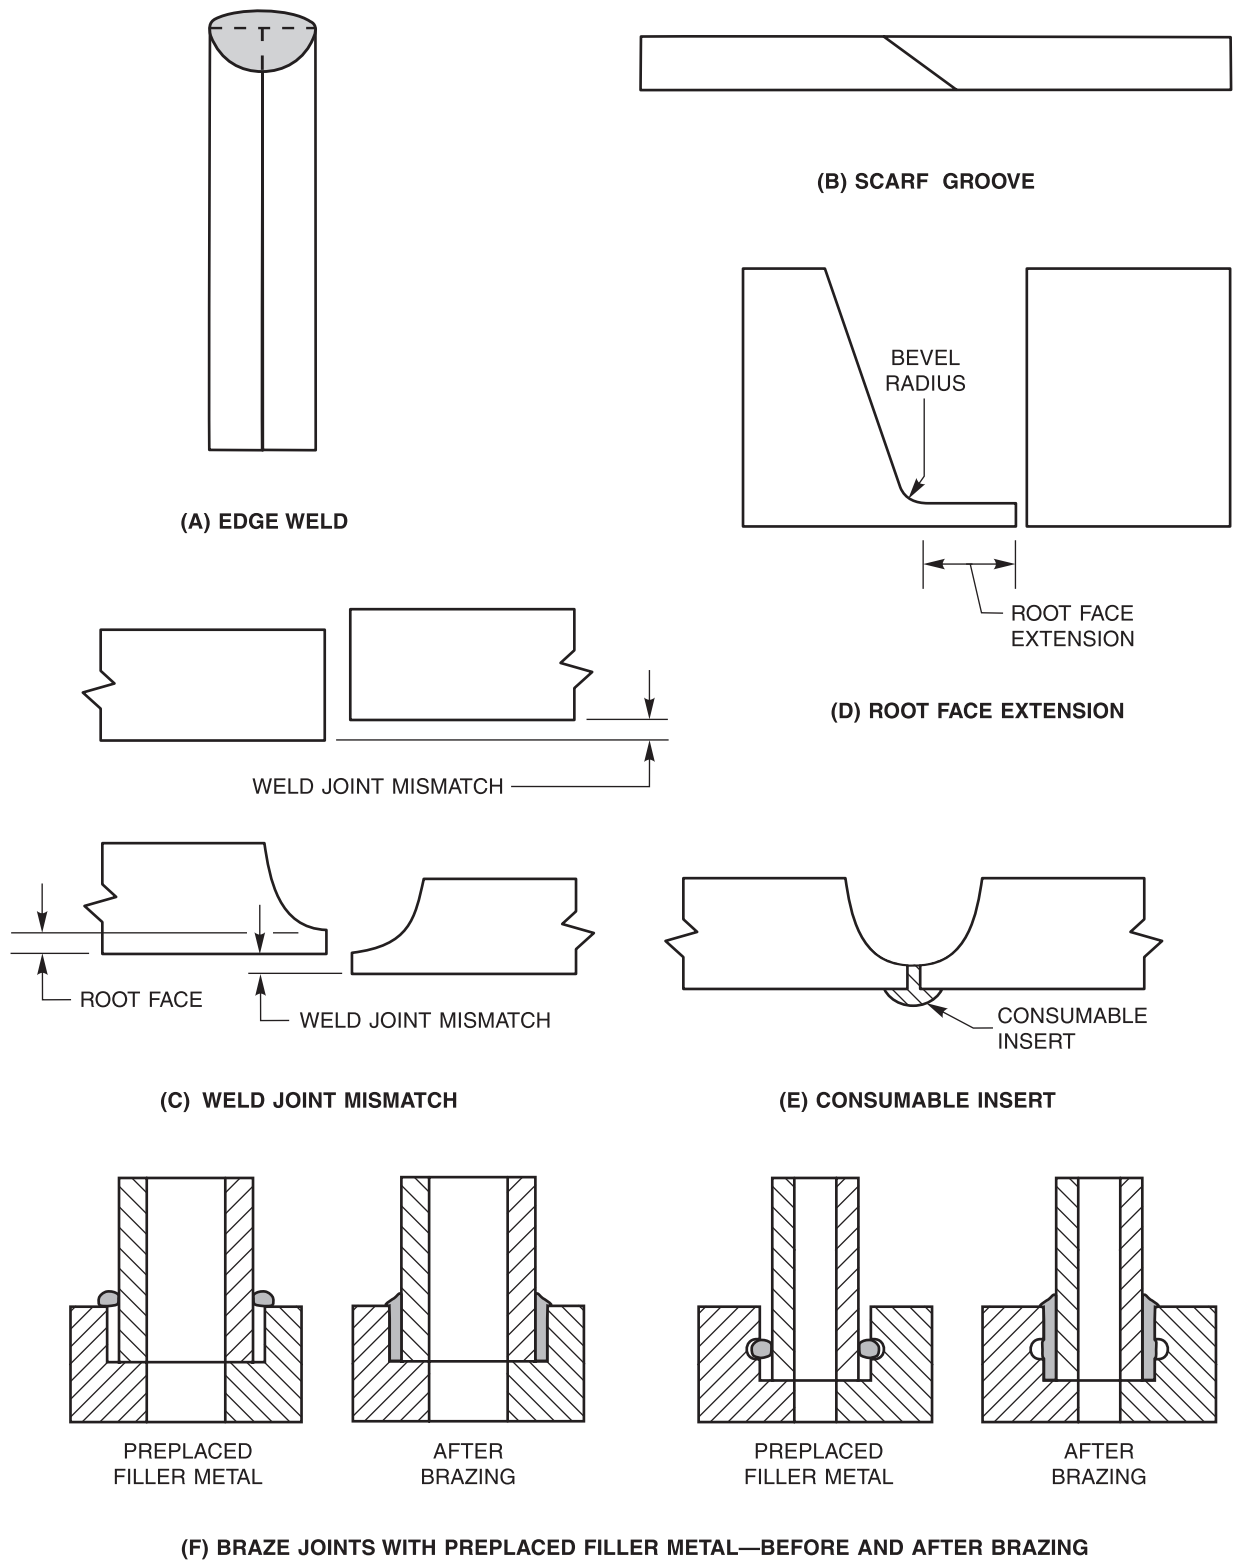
Edge Weld, Scarf Groove, Weld Joint Mismatch, Root Face Extension, Consumable Insert, and Preplaced Filler Metal in a Brazed Joint
